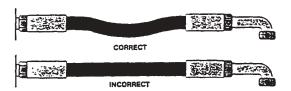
HOSE AND MACHINE TOLERANCES
